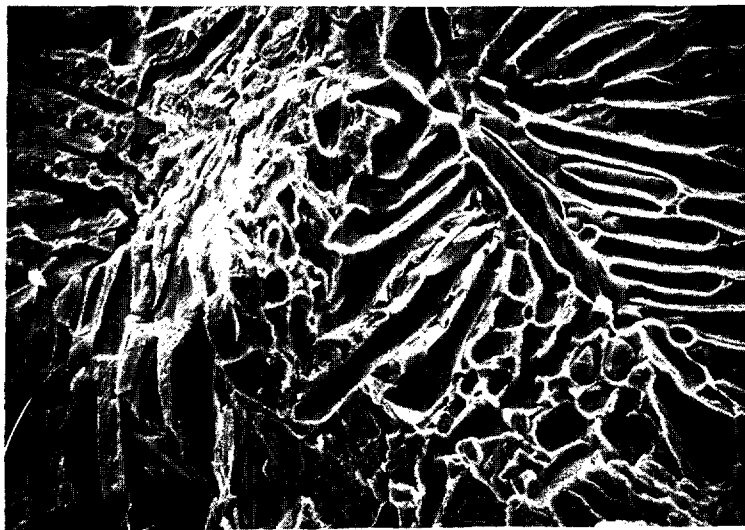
Fracture surfaces of clean cast steel.
